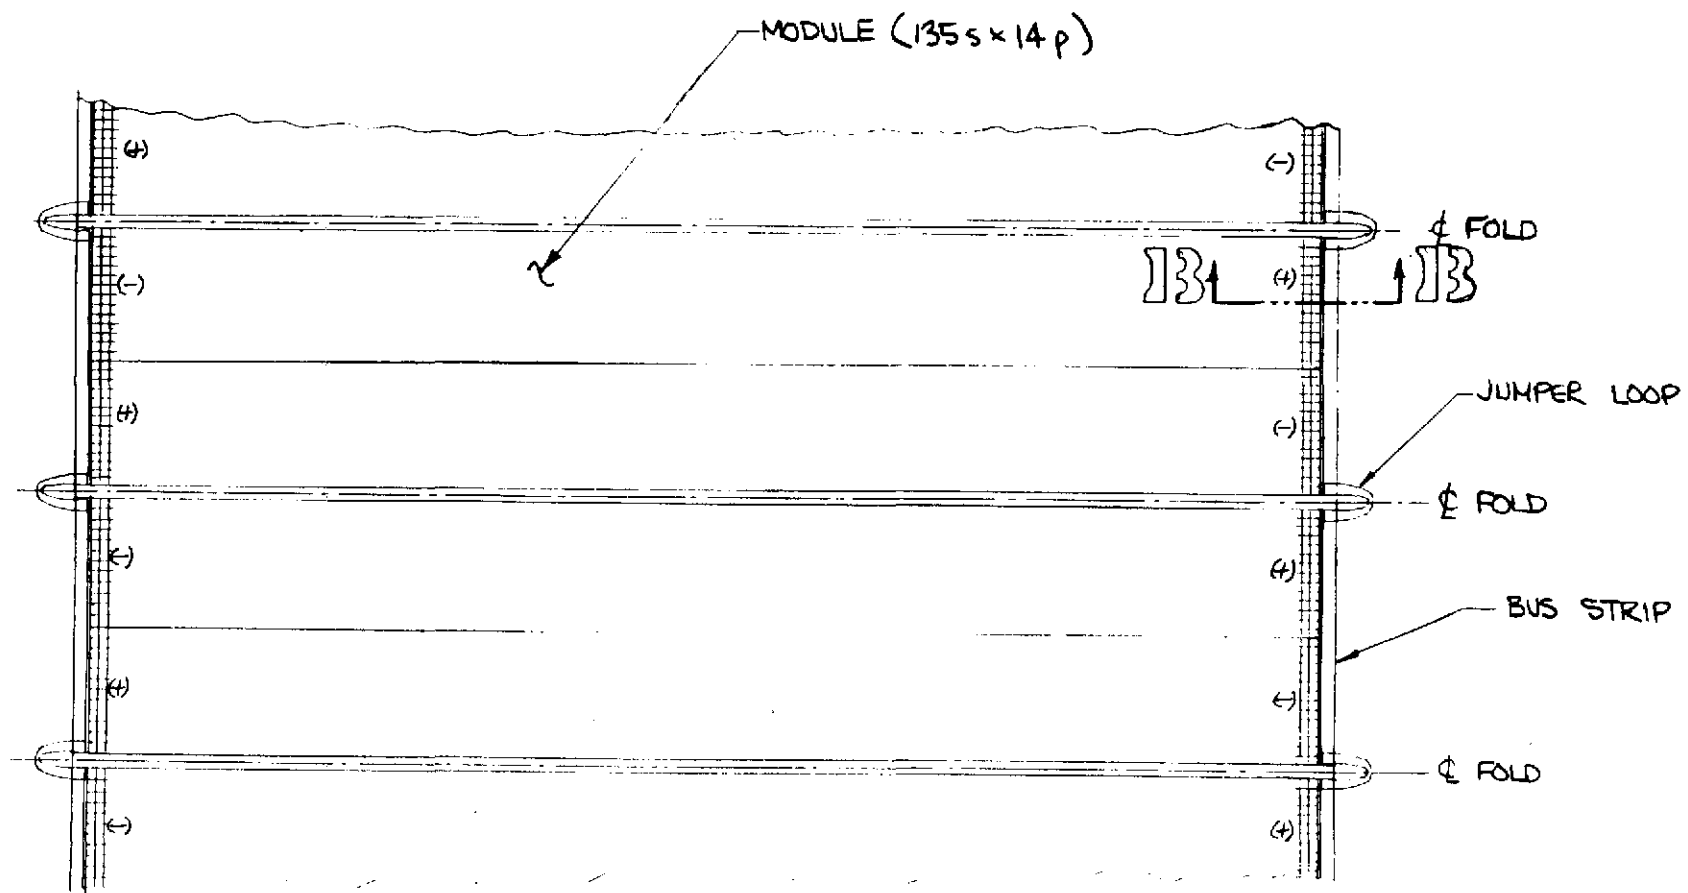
Detail of Module Arrangement on Solar Cell Blankets
